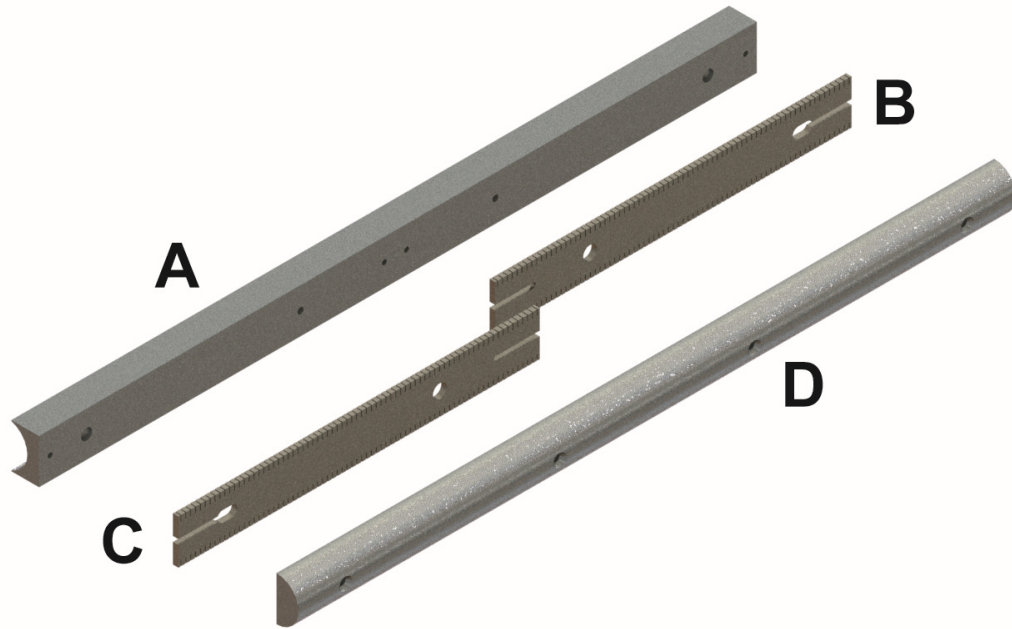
Isometric/exploded view of reed attachment block assembly
